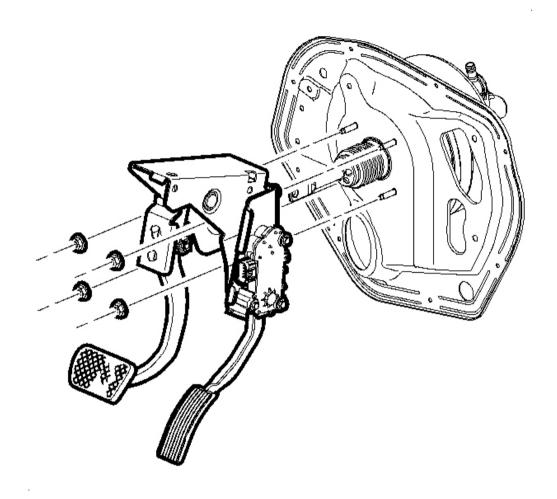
Removing/Installing Brake Pedal Assembly Courtesy of GENERAL MOTORS CORP.
